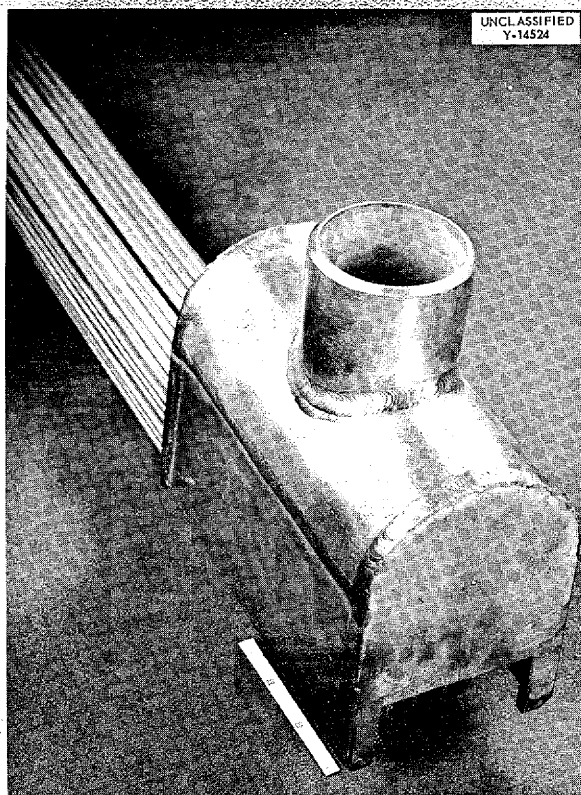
Welding of a Header of the Intermediate Heat Exchanger No. 2. The strongbacks used to minimize distortion may be seen.
